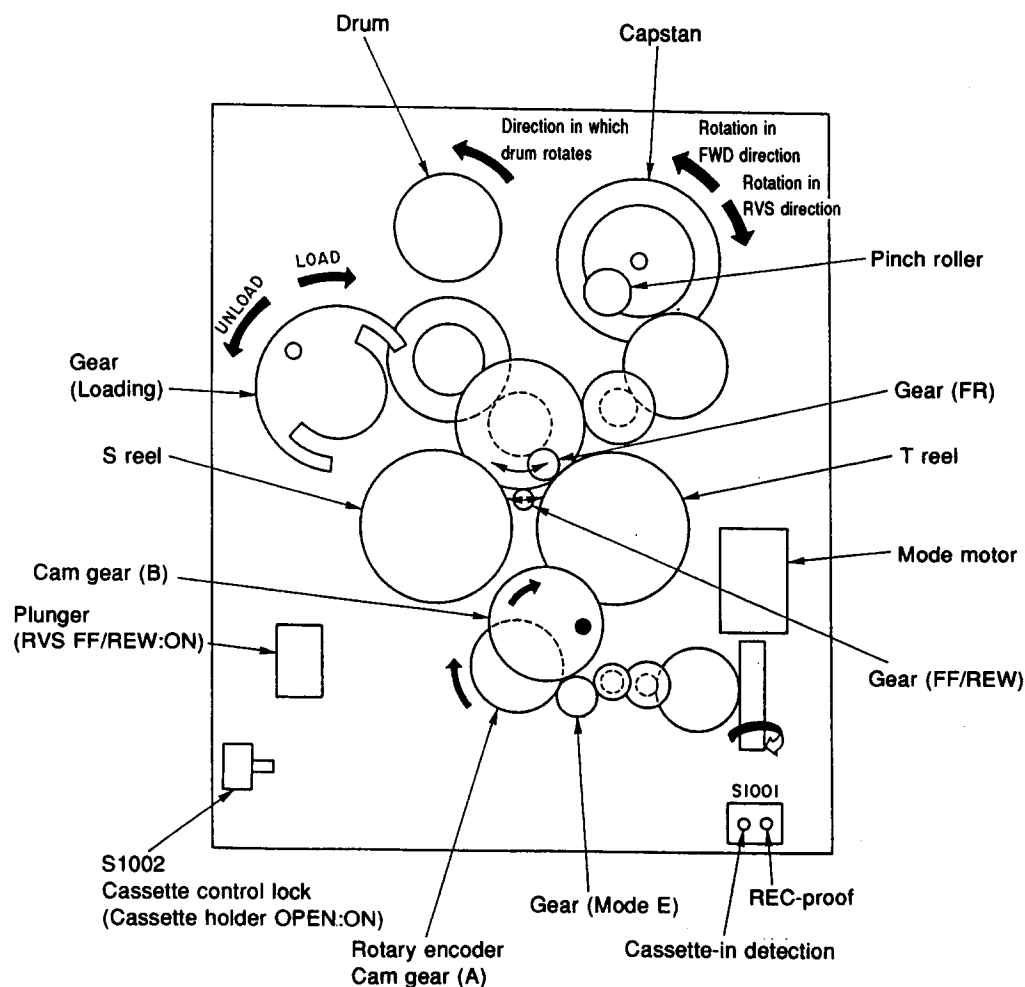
Main Parts of Mechanism Deck (Front View)
